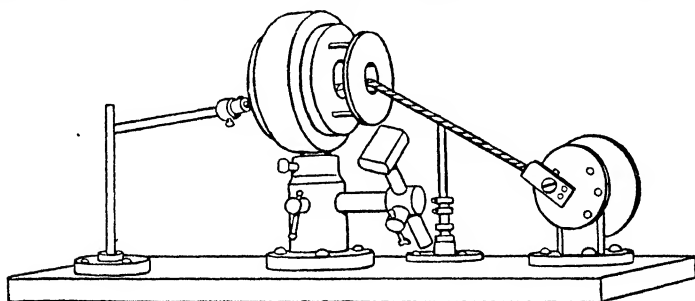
Rope-polishing machine, for large holes, horizontal arrangement
